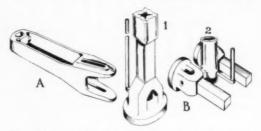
(A) Drawbar yoke railway castings are usually run into the bottom jaw—yield, 76-82 per cent. (B1) Buffer casting is cast on end, run in bottom flange and fed by gravity head—yield, 70 per cent. (B2) Two buffer castings per flask are machine molded and run into a central head—yield, 69 per cent.
